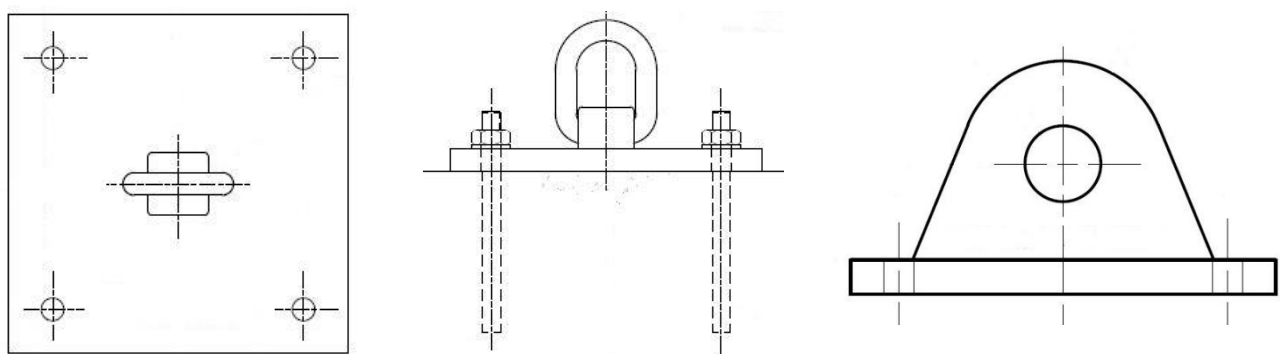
Example Lug Arrangement – Rud and Welded Plate Style
